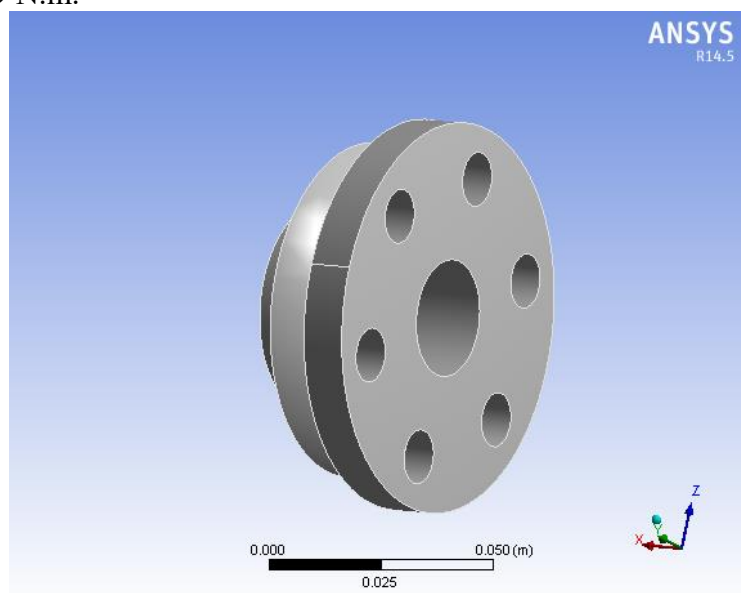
3-D geometry of the carriage assembly prepared for FEA
